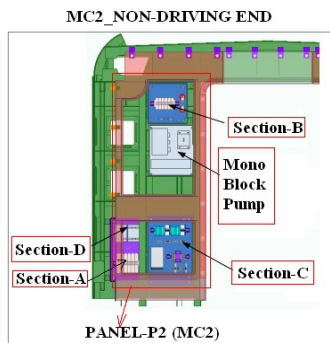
Panel-P2 Equipment details of MC2 Coach
